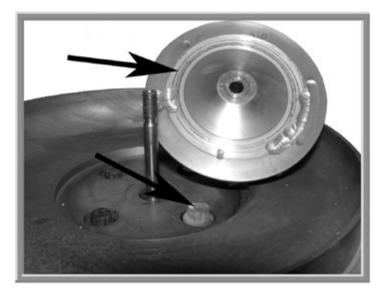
Back Plate Bolt Loosened and Contacted Back of Compressor Wheel
